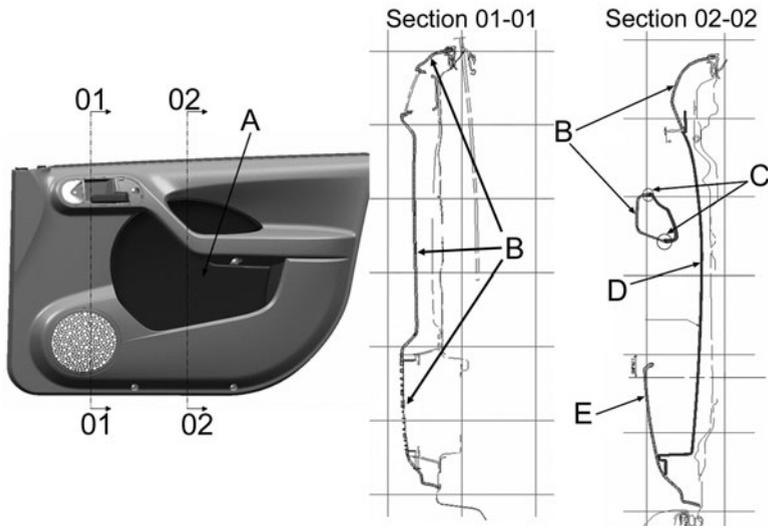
Section of a monolithic panel of Polypropylene. Details: A and D central part, B and E Polypropylene door panel, C welding.
